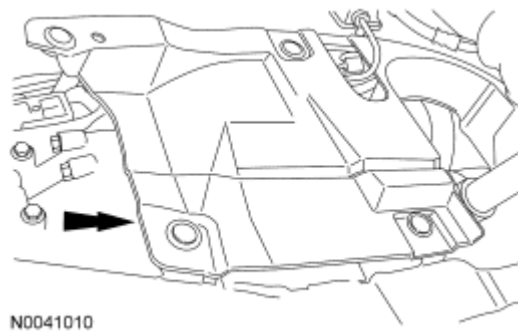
Locating LH Front Structure-To-Subframe Splash Shield
